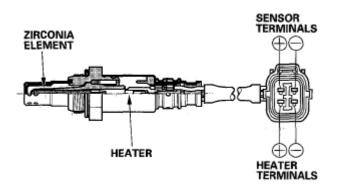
Sectional View Of Secondary Heated Oxygen Sensor (Secondary HO2S) Courtesy of AMERICAN HONDA MOTOR CO., INC.
